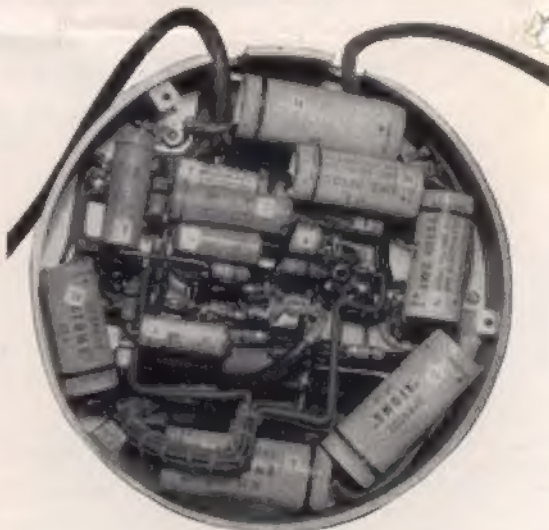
Bottom View of Amplifier Showing Parts Layout
